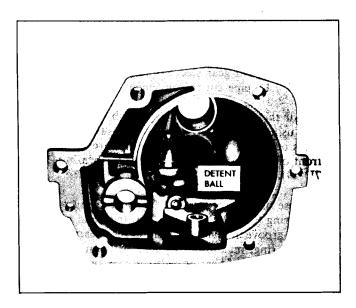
D-26 Installing Reverse Shifter Shaft and Detent Ball
